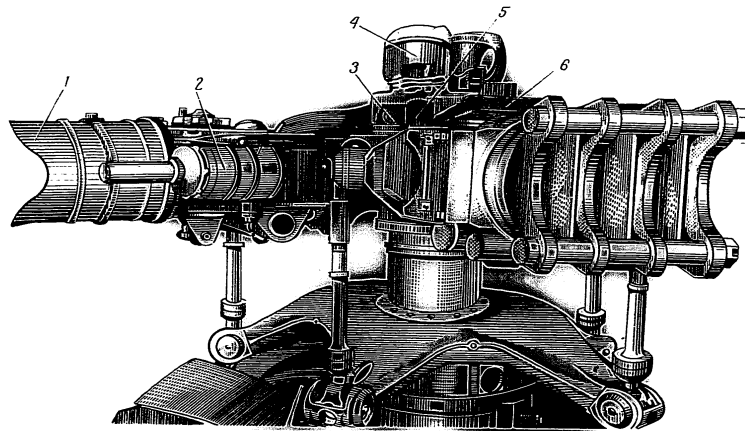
MAIN ROTOR HUB WITH SLIP RING
